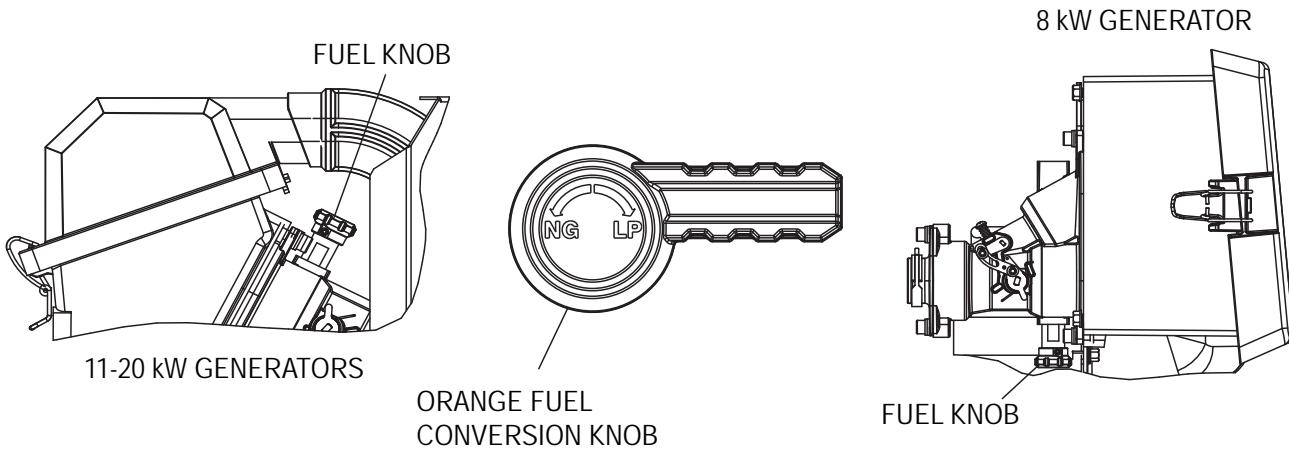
Fuel Conversion Knob Location for Single and Twin Cylinder Generators
